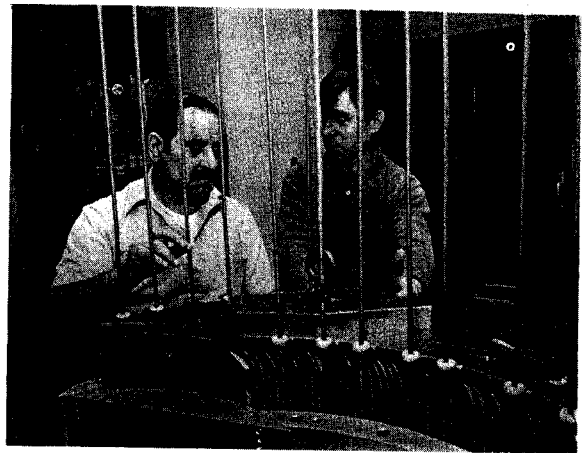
An outer pole tip section with its seven trimming windings as it is being lowered into the vacuum potting fixture.
